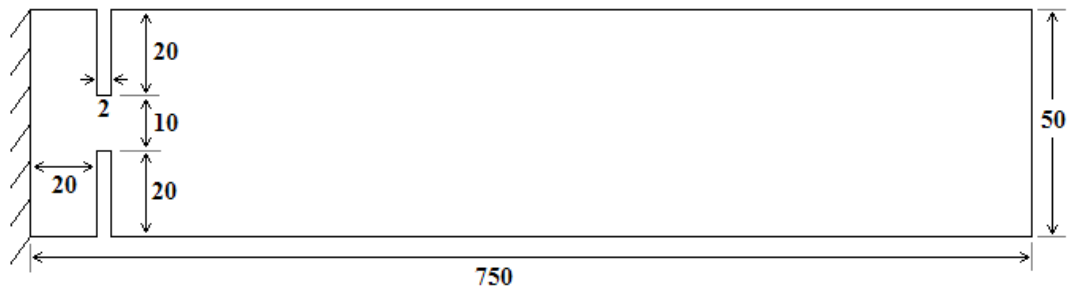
Dimensions of the test specimen (Dimensions in [mm])
